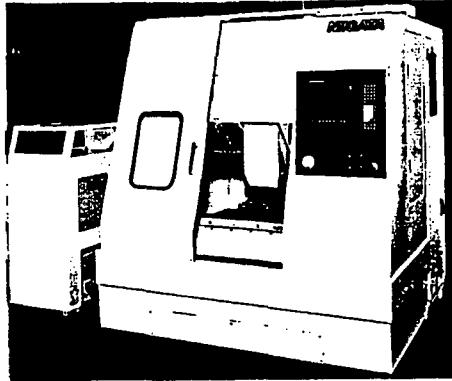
100,000 rpm ultra high speed milling machine developed in 1990 by NIIGATA ENGINEERING
